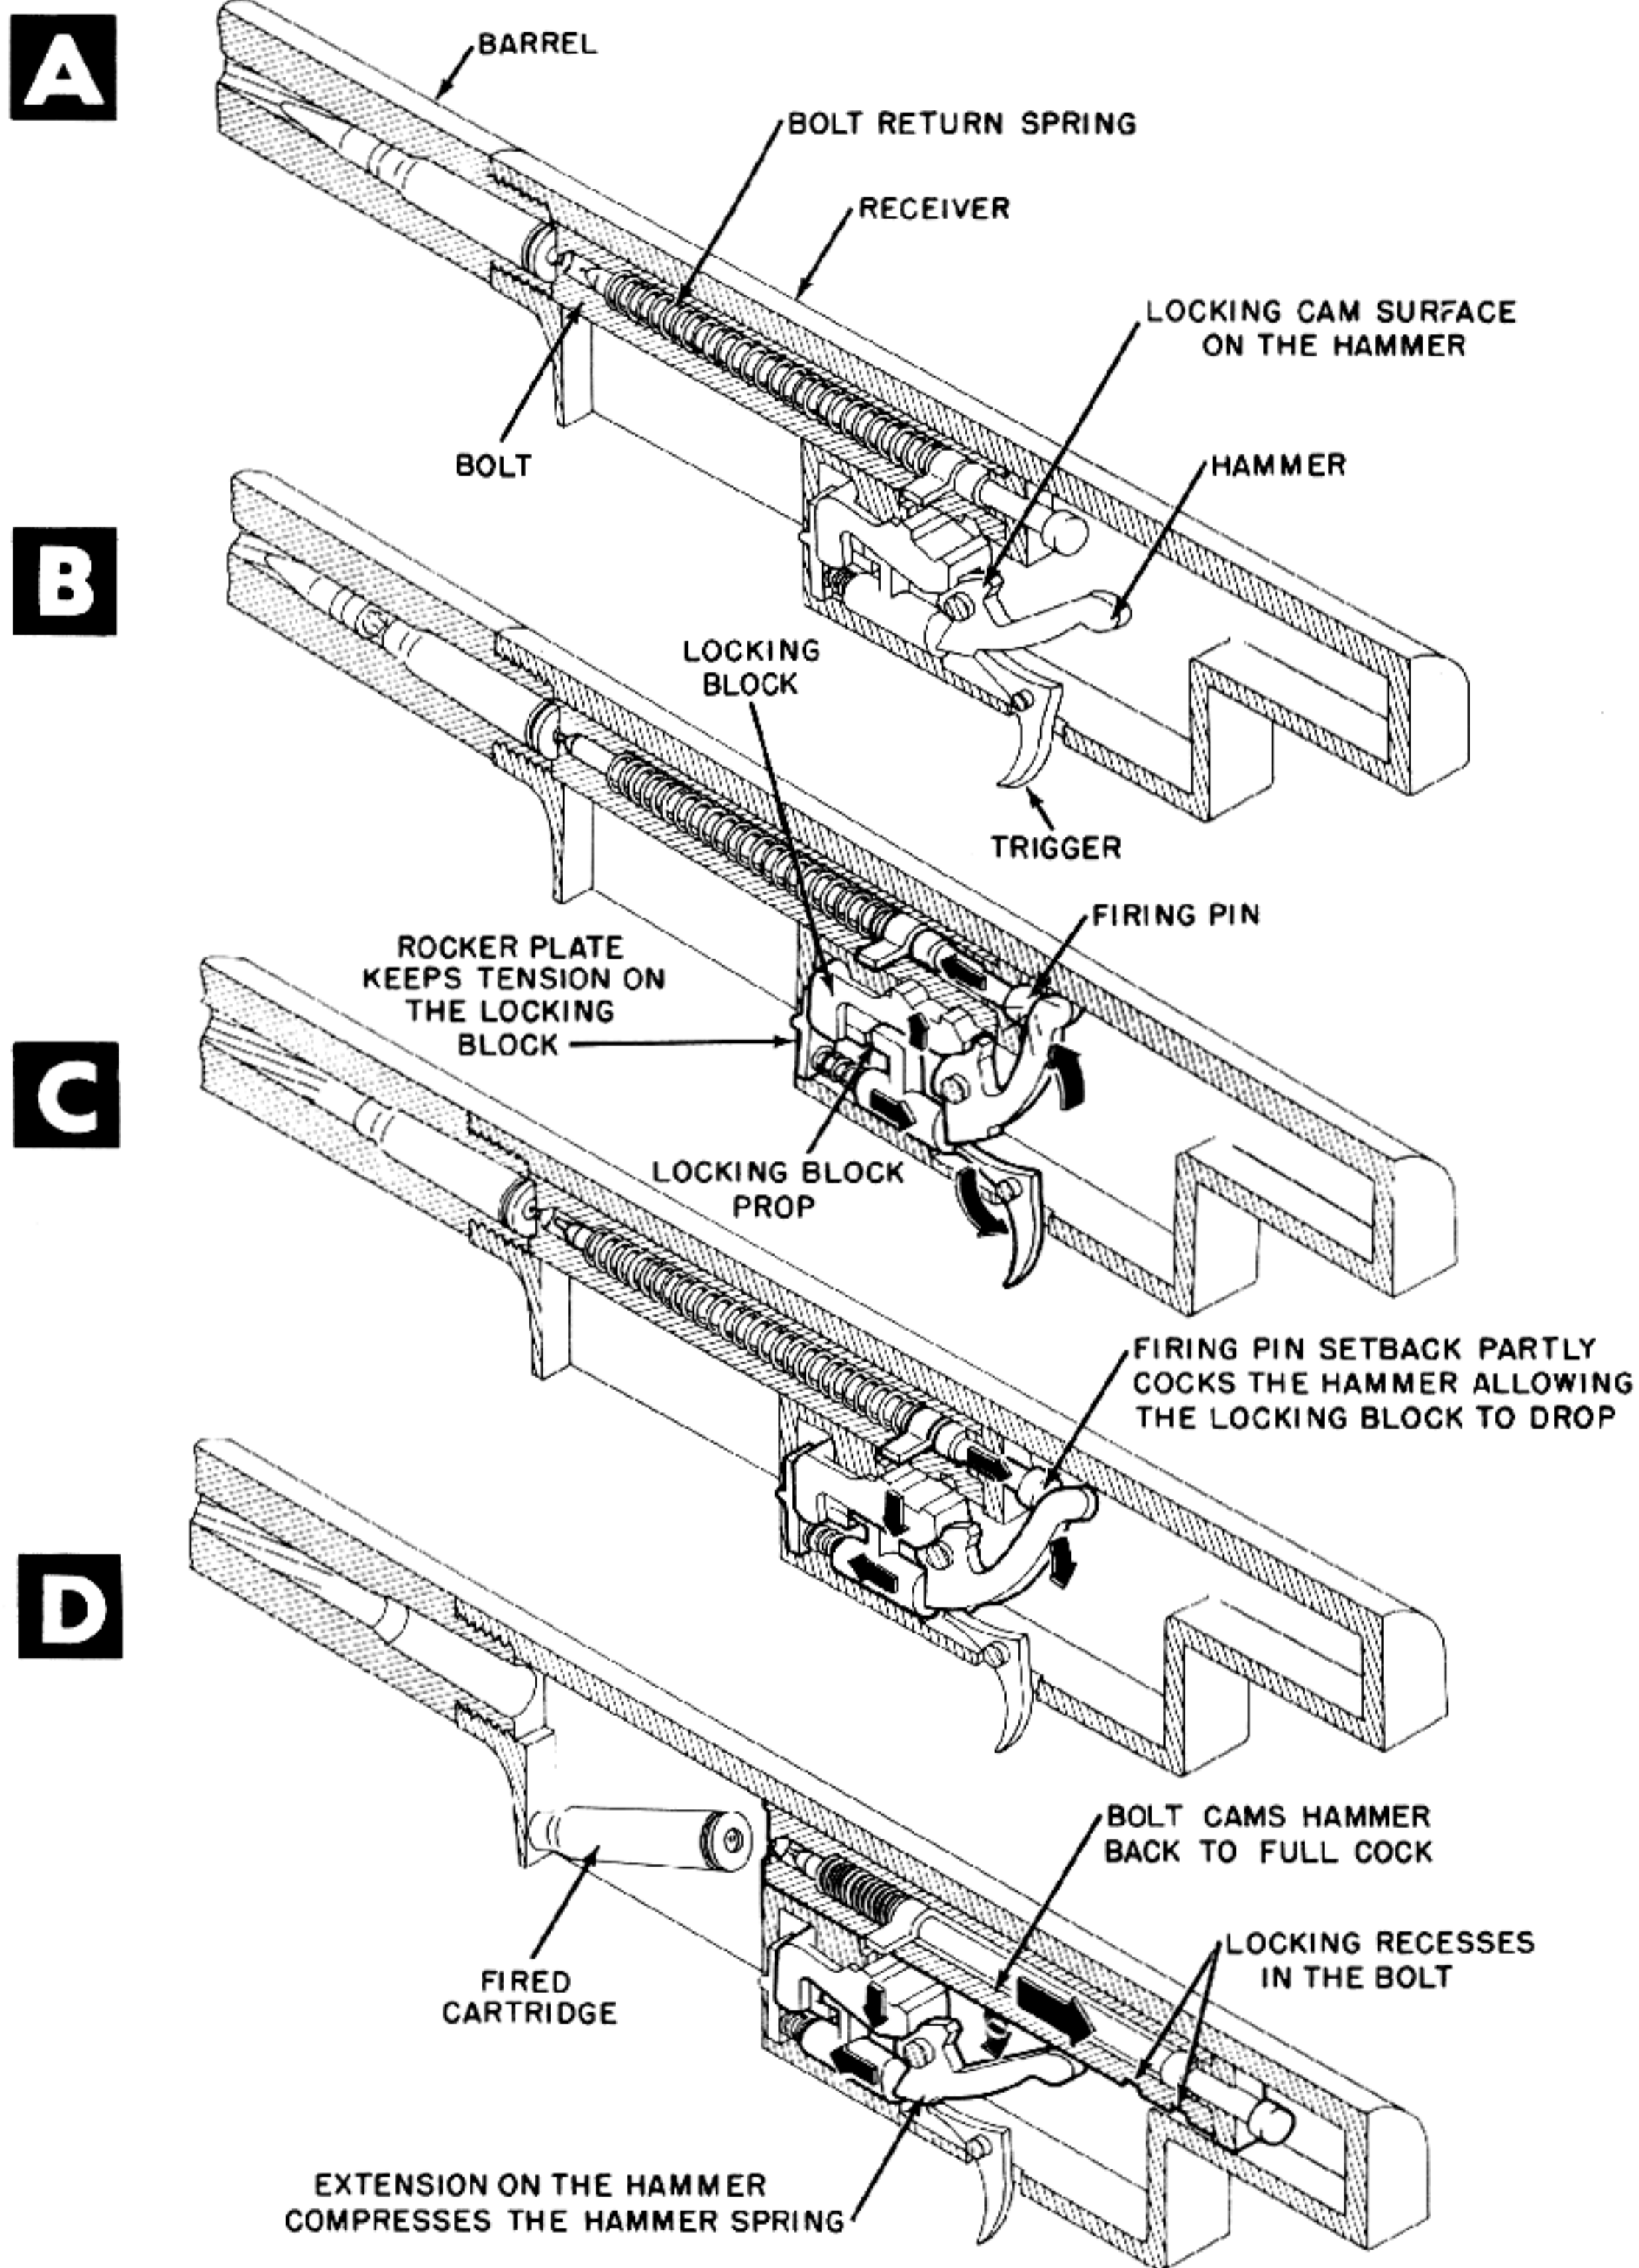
Bolt Is Locked by Action of Hammer on Locking Block.
